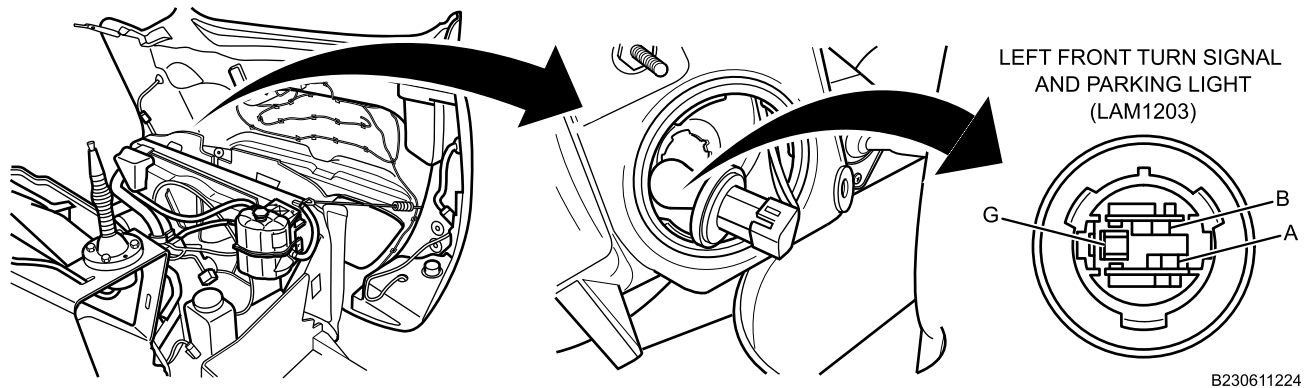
Left Front Turn Signal Bulb Socket (Near Headlight).
